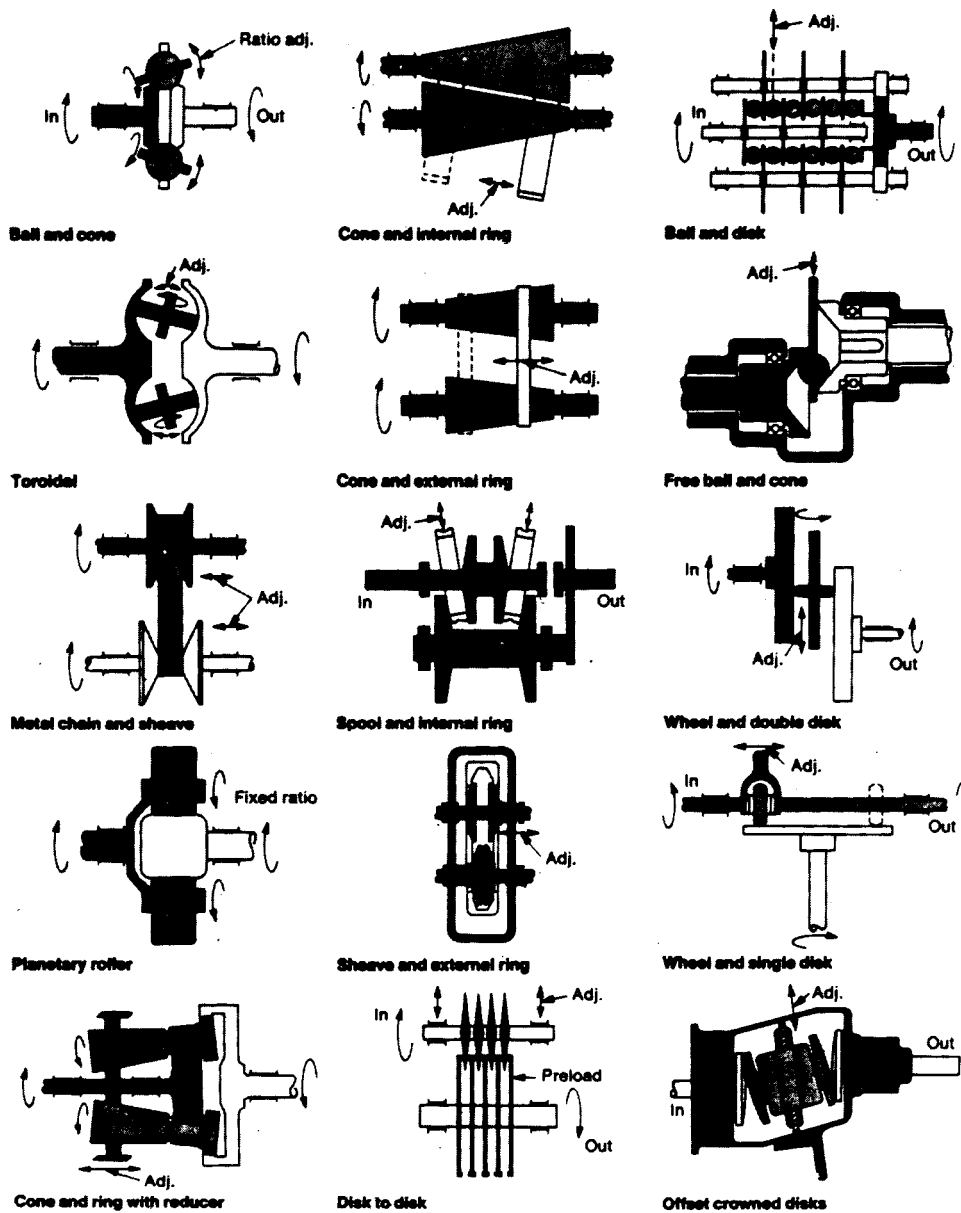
Typical industrial traction-drive geometries. (Courtesy of Design Engineering (ref. 4).)
